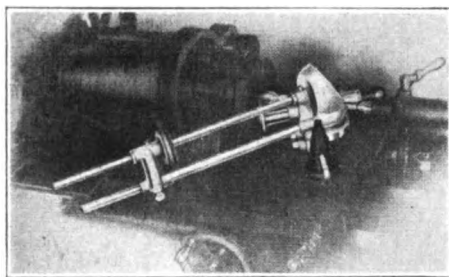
Shows Grinding Attachment in Position on the Lathe.
